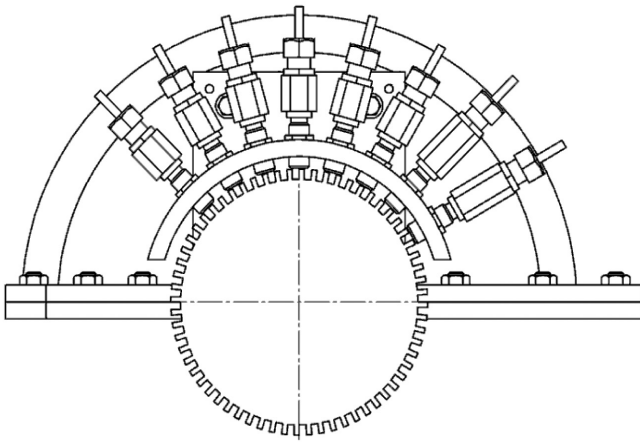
Speed Sensing Gear and Bracket with Multiple Probes. (Courtesy Woodward)
